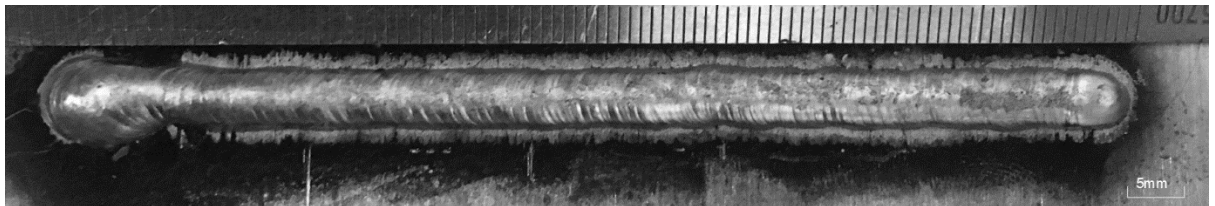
The welding layer with 5.5m/min feeding wire speed
